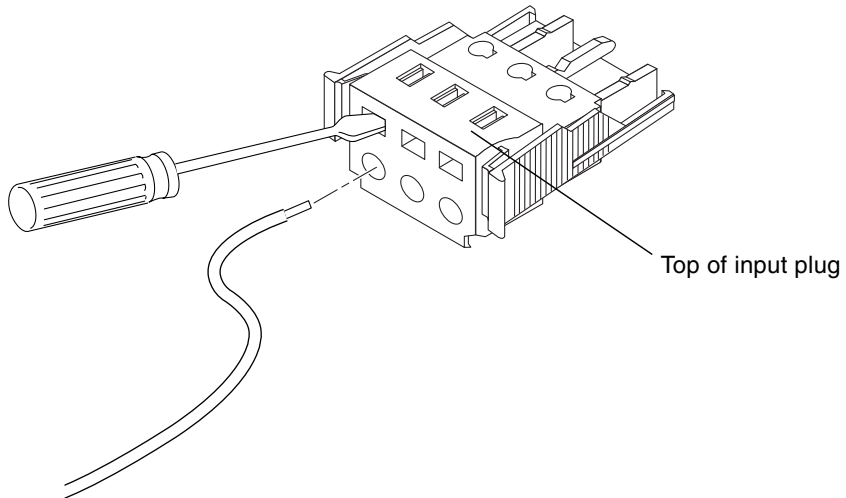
Opening the Cage Clamp Using a Screwdriver
